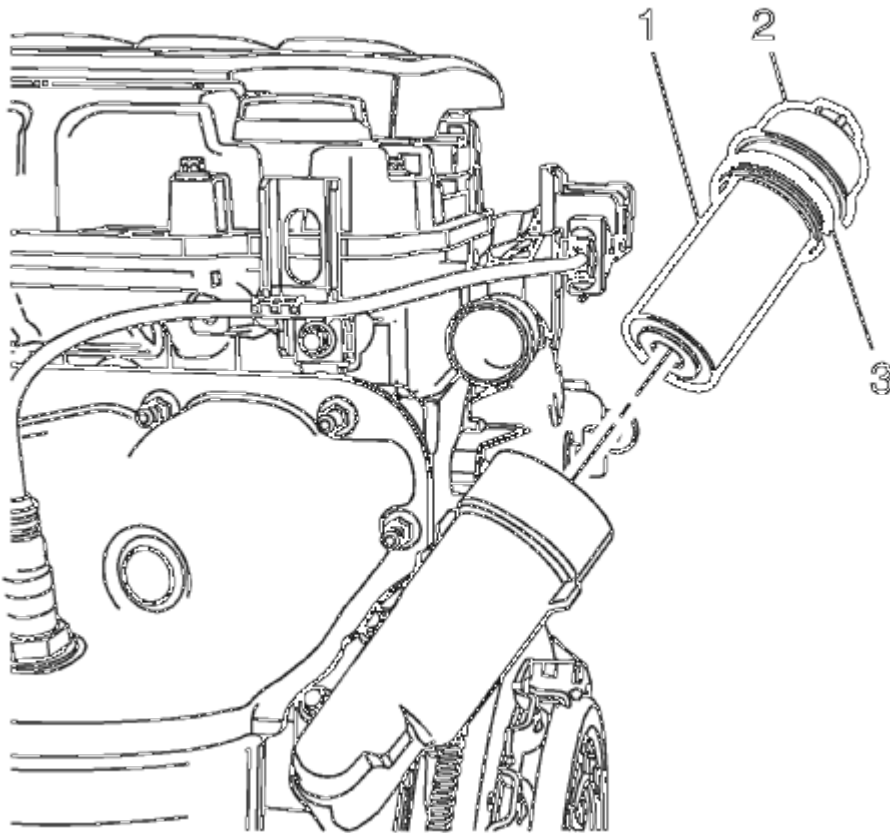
Engine Oil Filter Cap, Cap Seal Ring And Oil Filter Element
